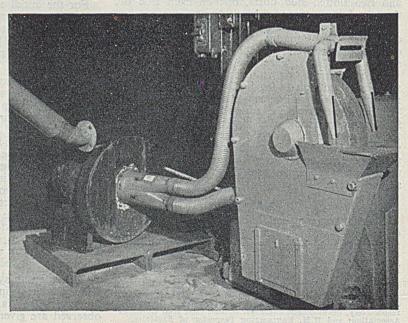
Combined Exhaust System applied to a 24- by 2-in, Wheel.
